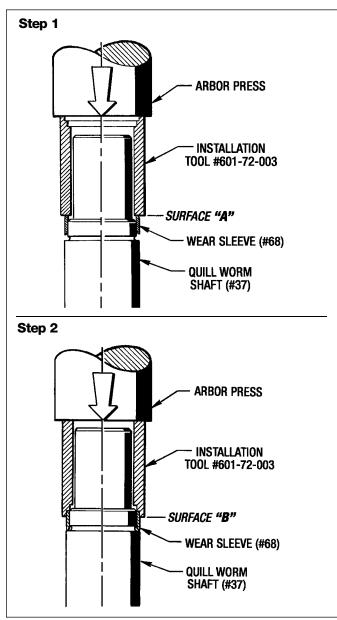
Installing Wear Sleeve (#68) on Quill Worm Shaft
